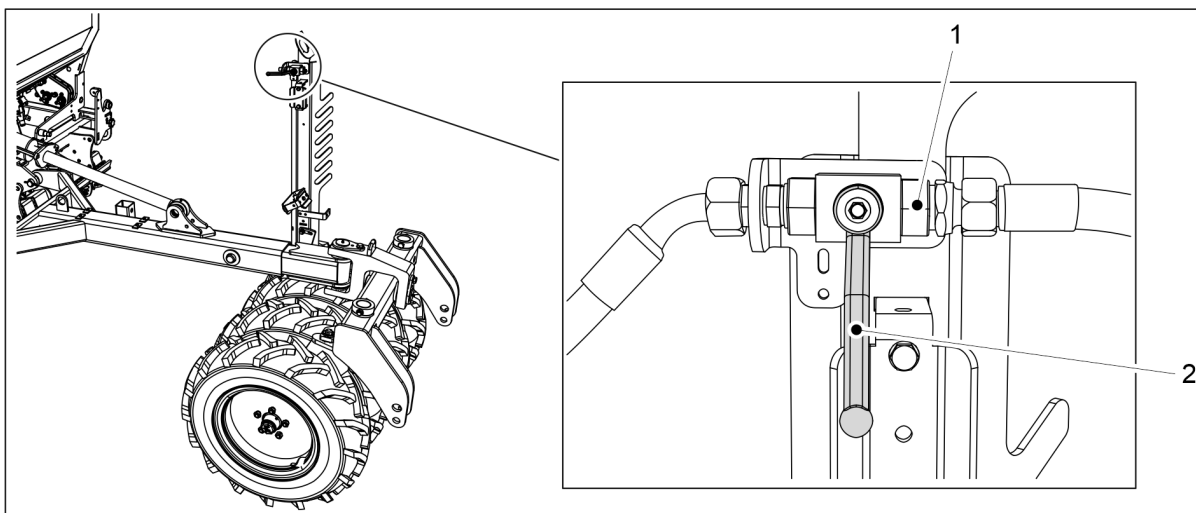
100. Closing the lifting circuit ball valve
